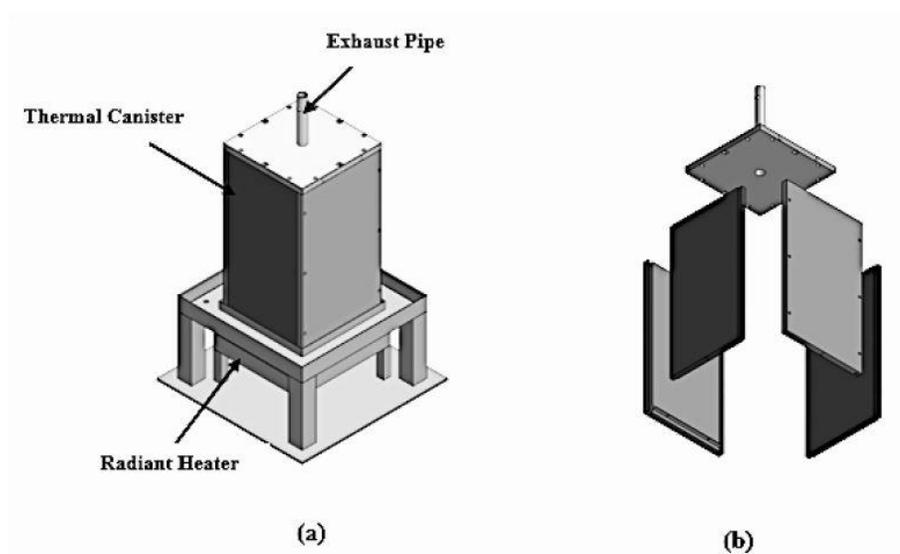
a) Thermal Canister Assembled, b) Exploded view of Thermal Canister [1]
